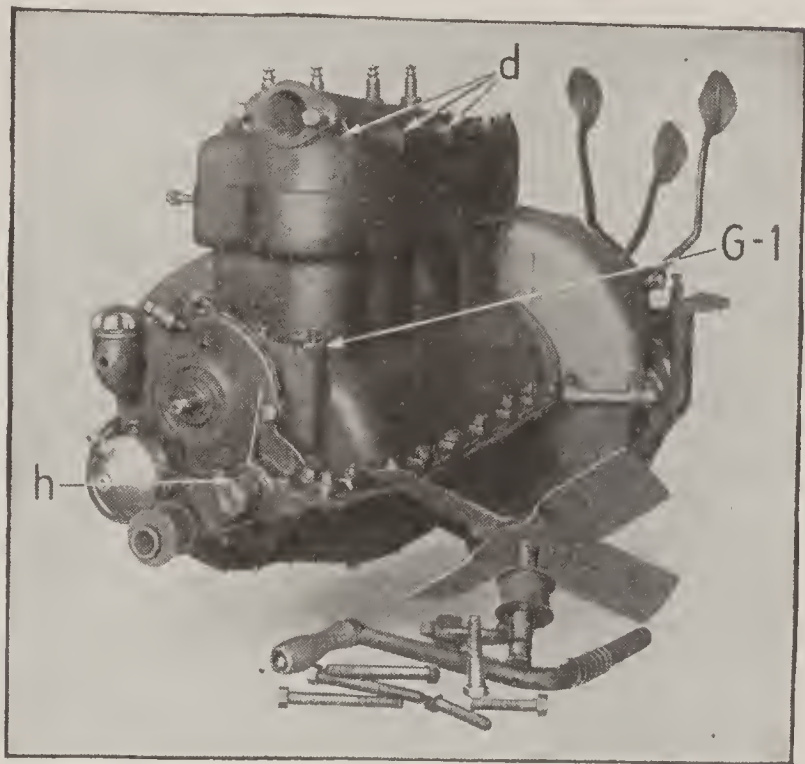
Ford Engine Ready for Installation of Westinghouse Electric Equipment
